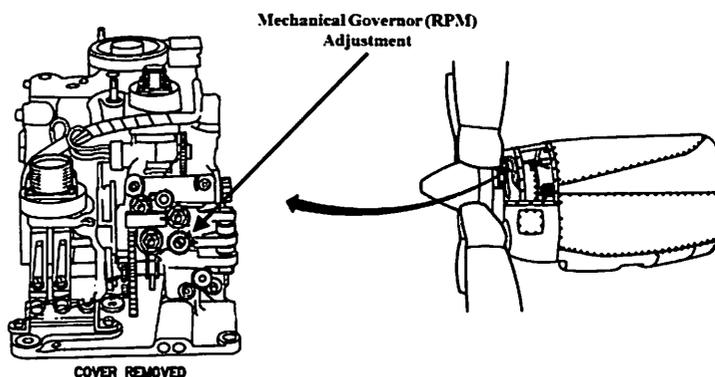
Location of Valve Housing Assembly on Engine and RPM Adjustment (Tabs DD-69 and Z-33)
